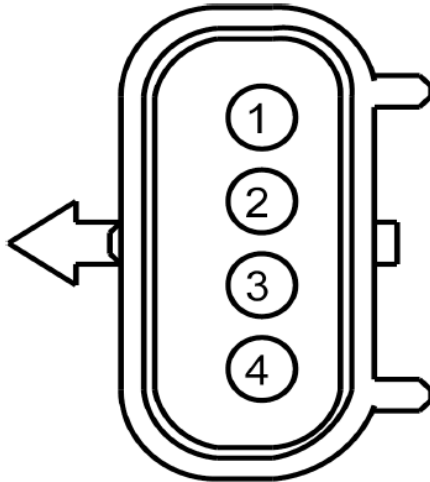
Right Front Side Lamp Connector End View (C1444)
